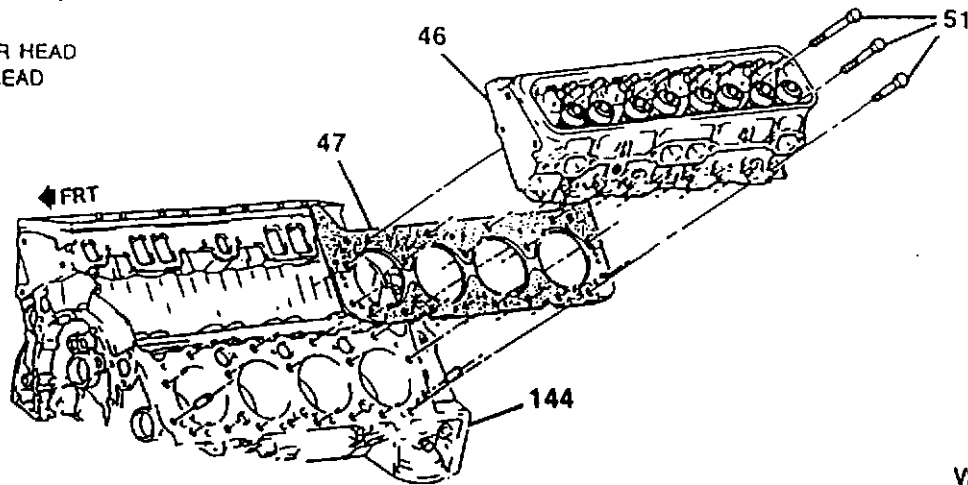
Cylinder Head (5.0L and 5.7L Engines)
